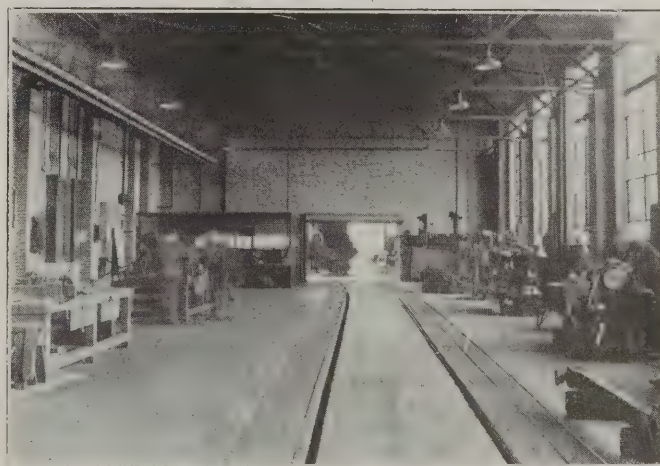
The Machine Shop Which Adjoins the 125-Foot Section
